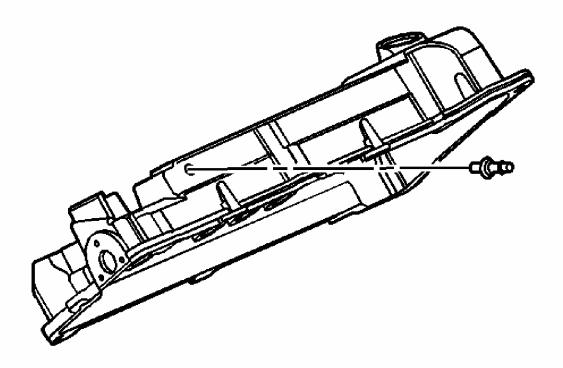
View Of Fresh Air Hose Fitting & Right Camshaft Cover Courtesy of GENERAL MOTORS CORP.
